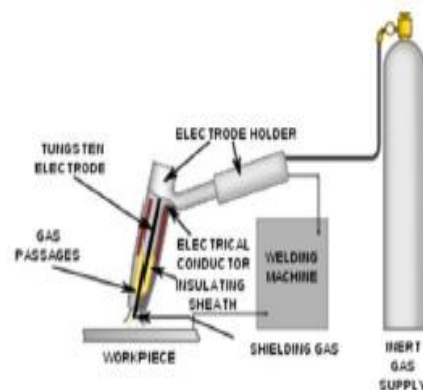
Schematic Diagram of TIG Welding System [2]
